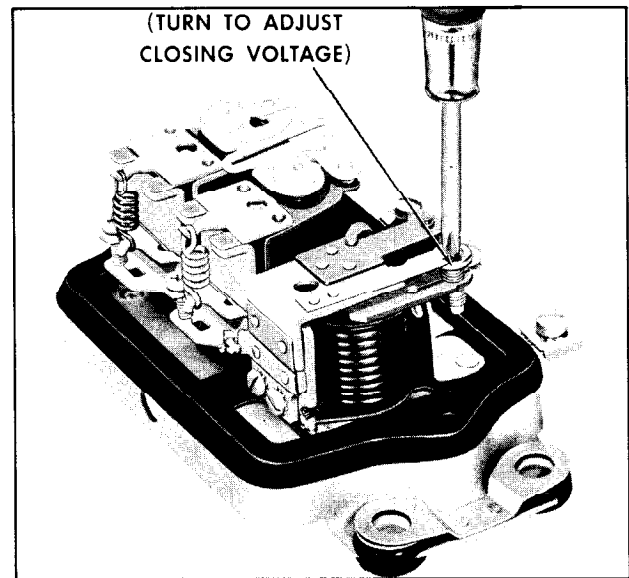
Adjusting Cutout Relay Closing Voltage (35 Ampere Regulator Shown)
